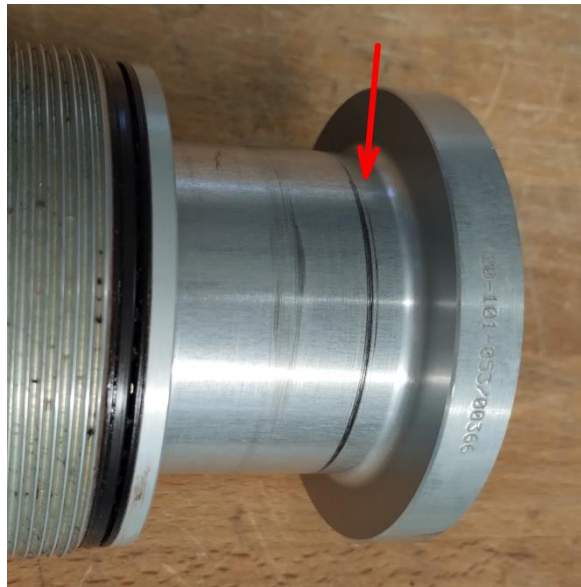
Groove caused by bearing ring on the surface of blade ferrule
